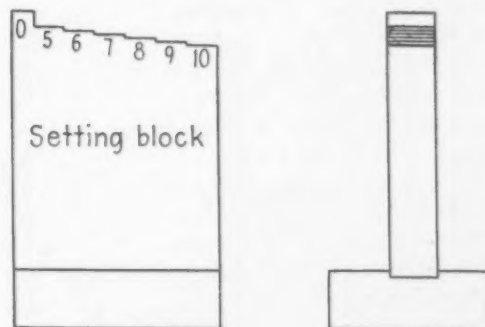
Setting block used for positioning the grinding wheel to produce the required rake angle on the tool.
